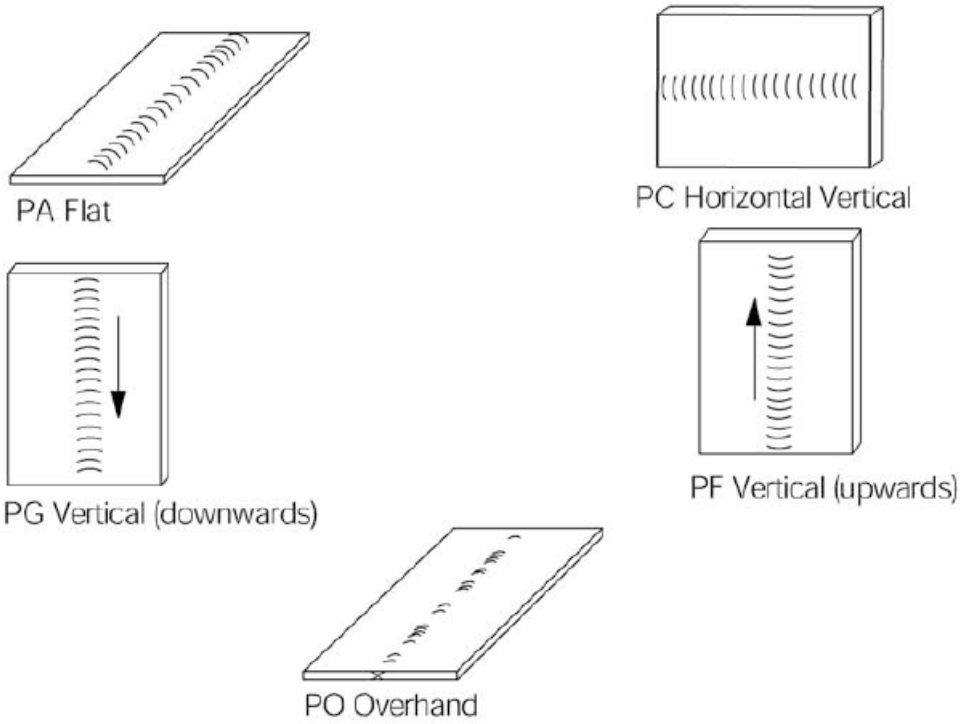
WELDING POSITIONS ACCORDING TO ISO STANDARD
